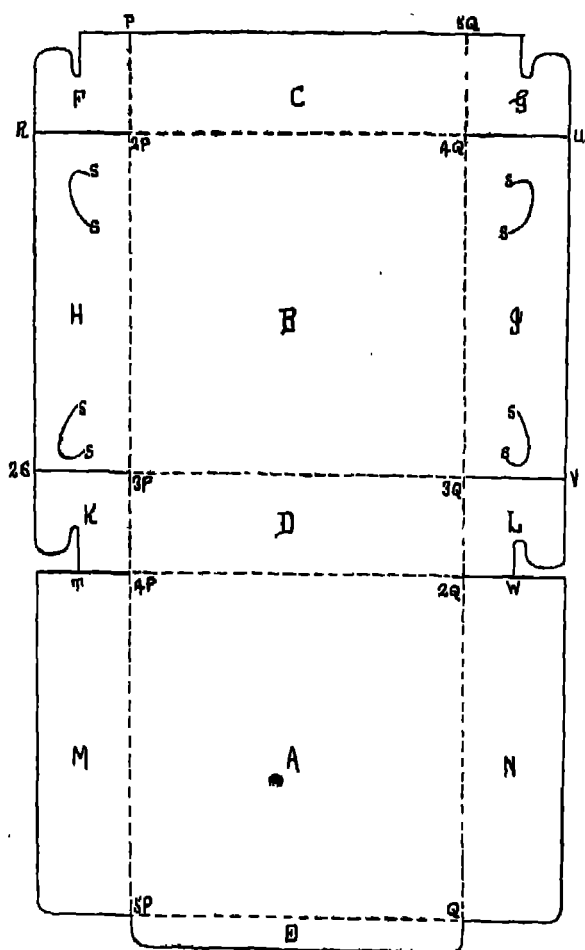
SINGLE-PIECE CONFECTIONERS' CAKE BOX.
